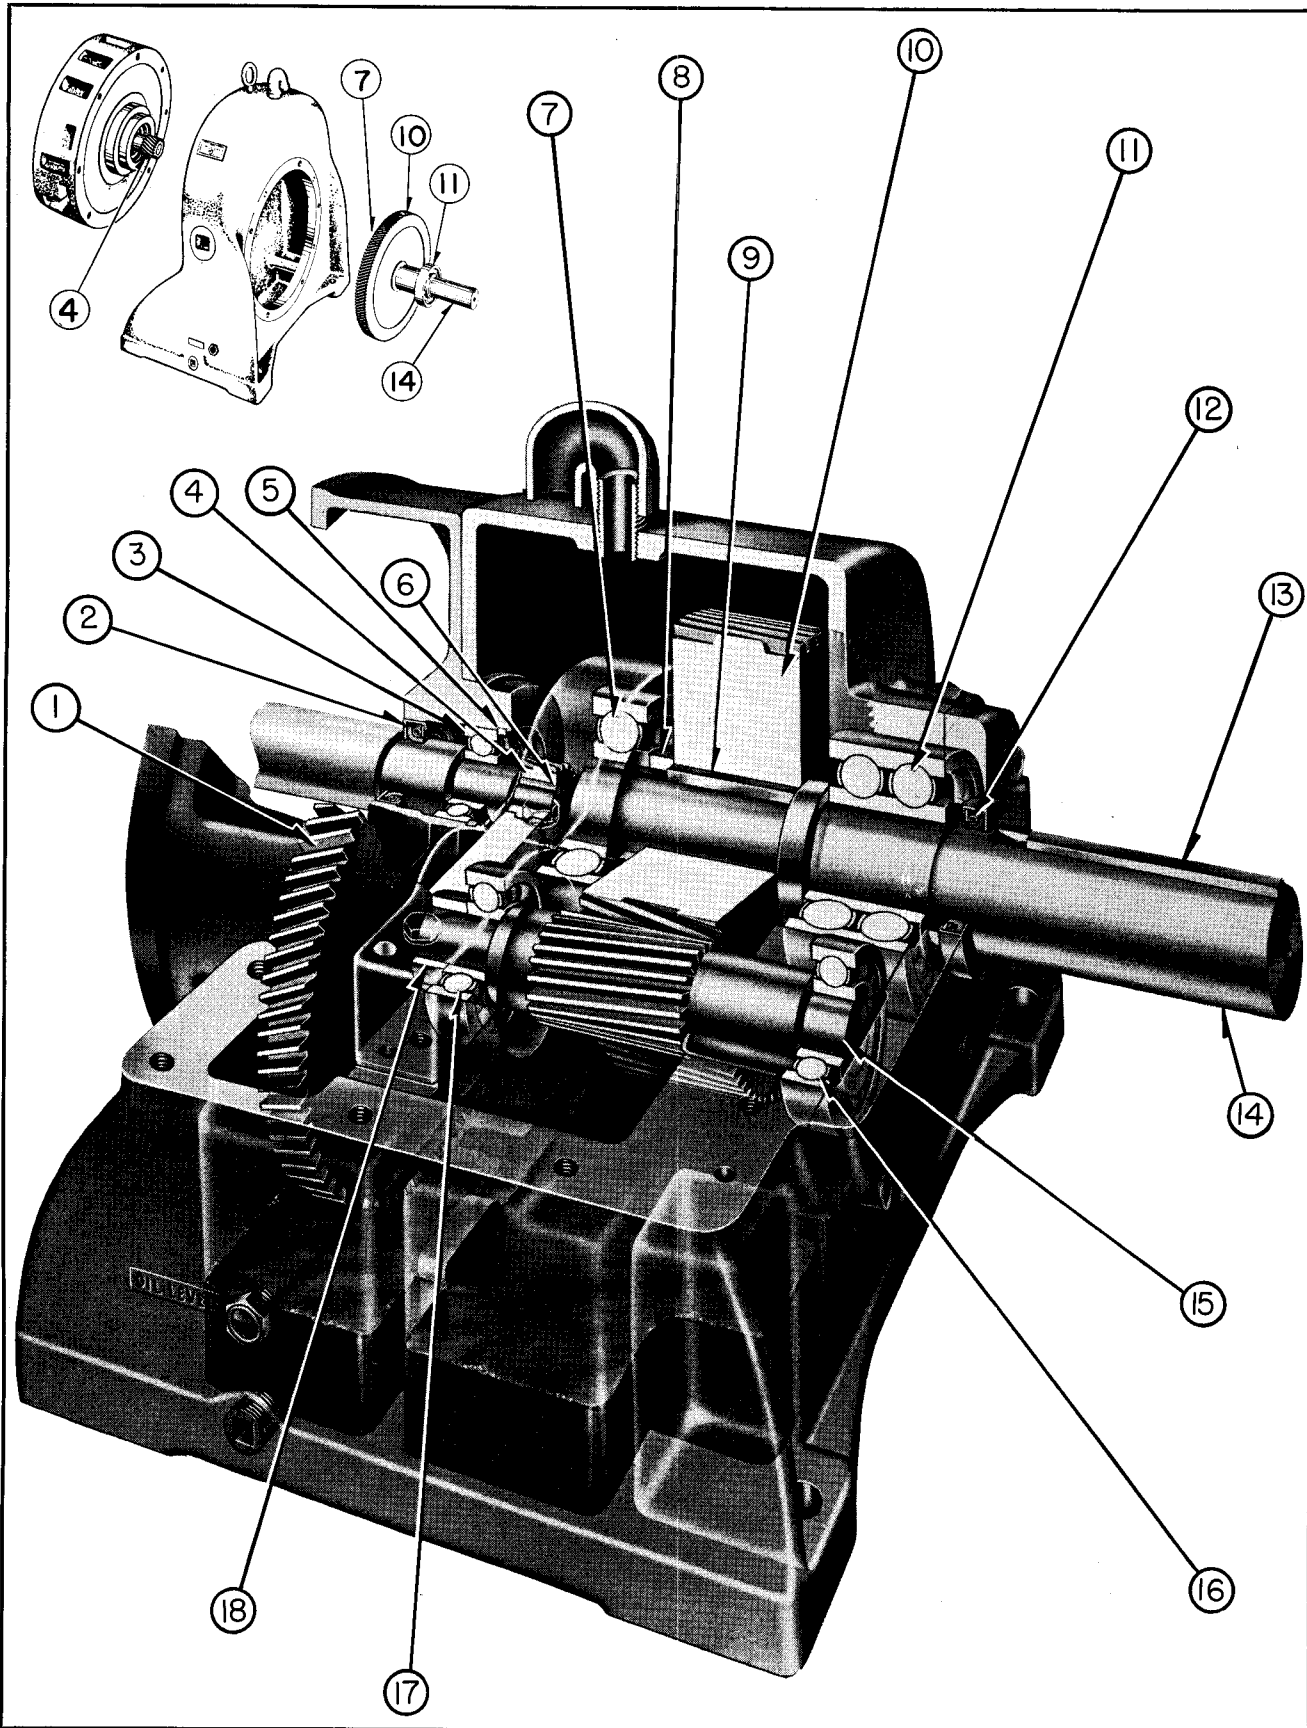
Cutaway of Double Reduction Geared Drive Type C or E and Sketch of Single Reduction Type A Arrangement.
